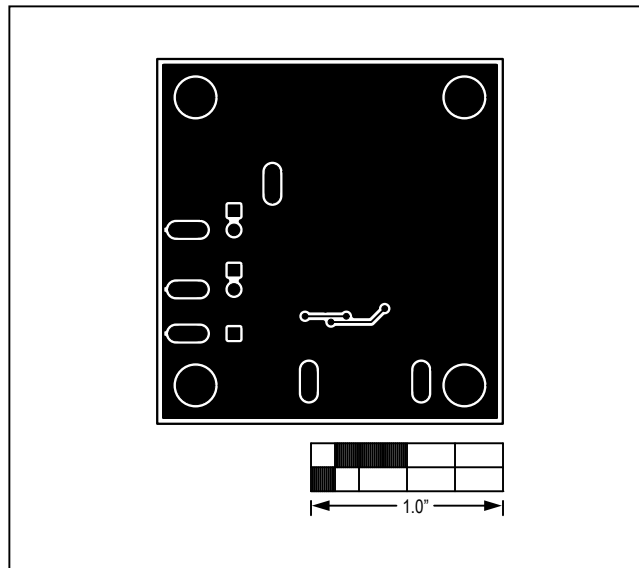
MAX15462A EV Kit PCB Layout—Solder Side
